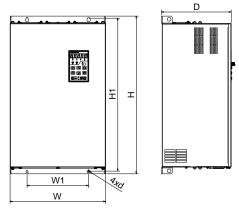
18.5~30kW Wall mounting diagram Table 1-4 Wall Mounting Size Table
